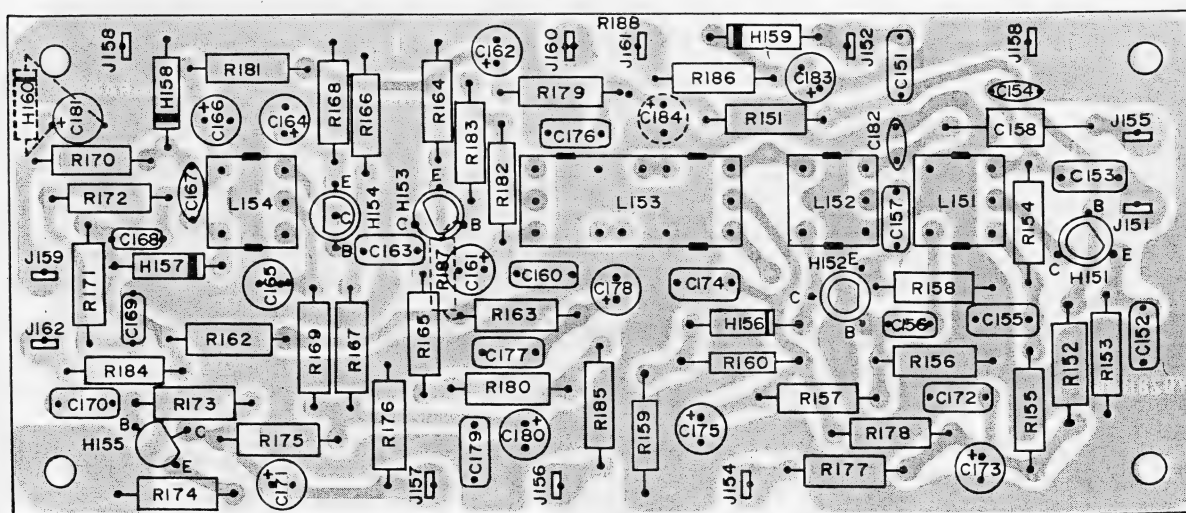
AM Tuner Unit Assembly P150 Component Locations
